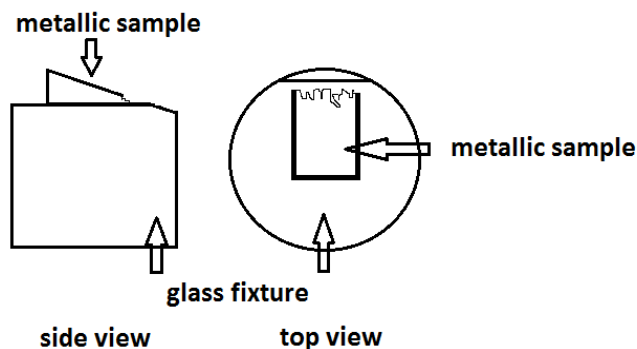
The side view and top view of the sample glued on the surface of the glass fixture. The edge of the sample is shown in the top view after polishing is jagged.
